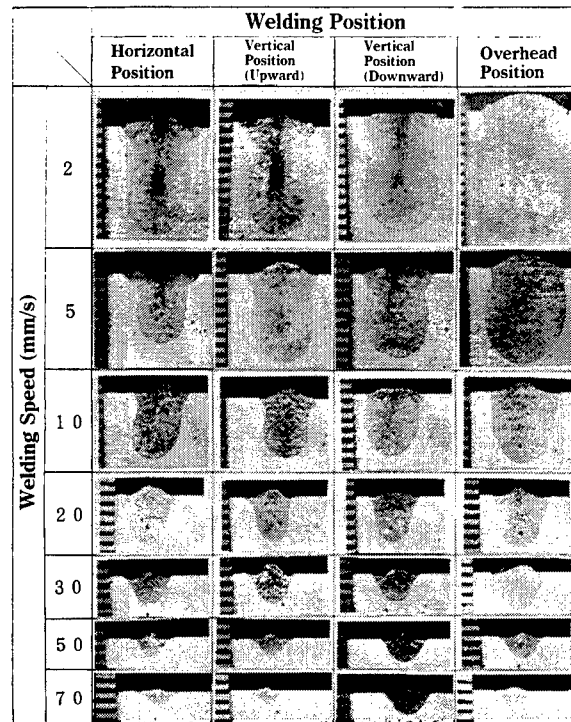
Cross-sectional photographs of horizontal, vertical and overhead position welding
